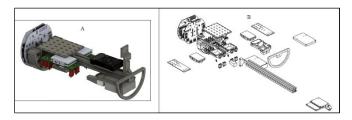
The second iteration rack. (A) Assembled design. (B) Exploded view.
